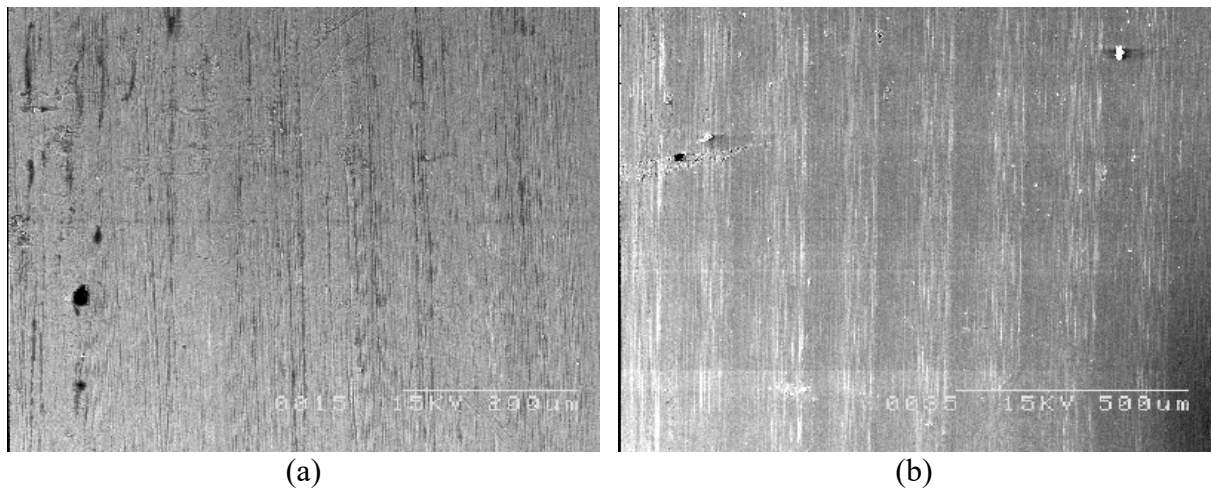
Surfaces generated after machining with uncoated carbide T1 tool with a coolant pressure of 7 MPa at cutting speeds of (a) 100 m min^{-1} and (b) 130 m min^{-1} .
